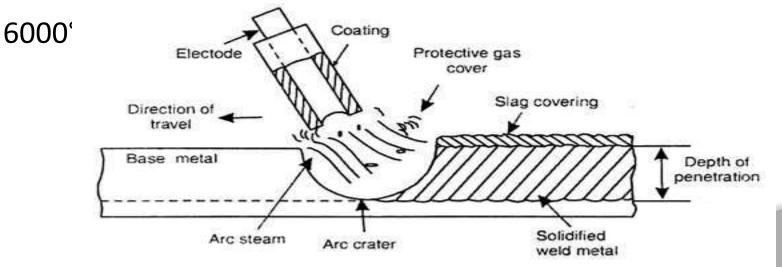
Cut away view of the arc welding with a coated electrode.
